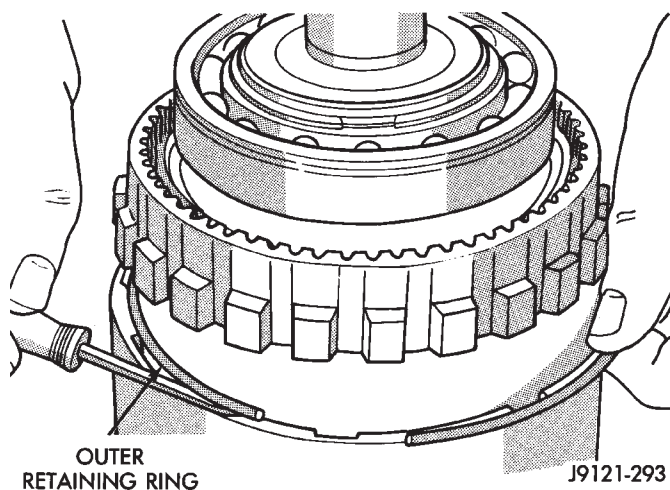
Removing Clutch Drum Outer Retaining Ring
